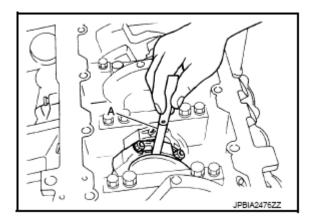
Measuring Side Clearance Between Connecting Rod And Crankshaft Arm Using Feeler Gauge Courtesy of NISSAN NORTH AMERICA, INC.
